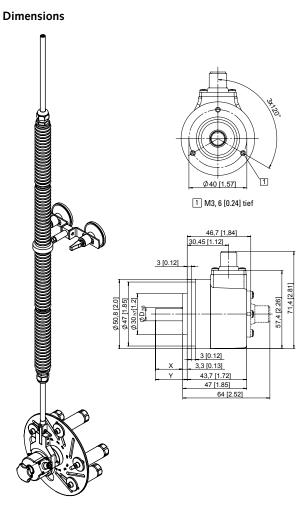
Dimensions WPT sensor (left side: including holder WPT)
